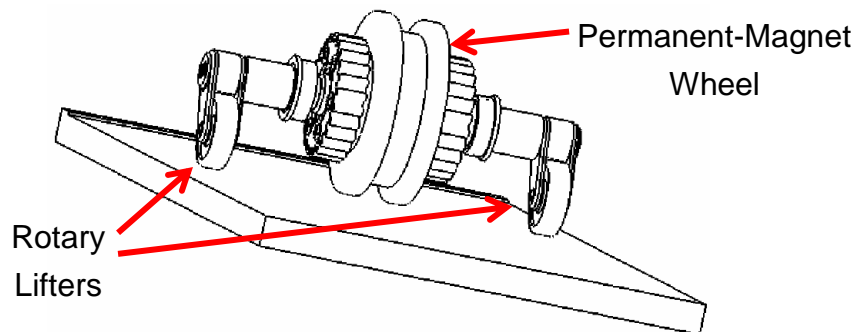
Magnetic wheel showing the method of force modulation using rotary lifters on either side of the wheel [1].
